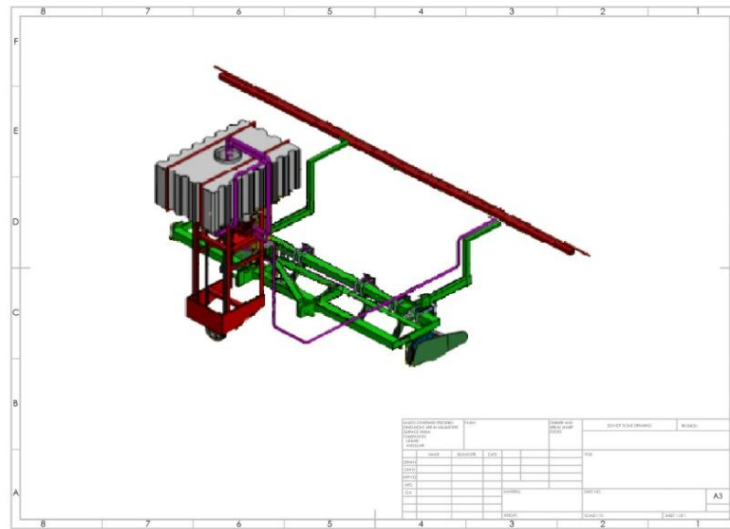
Developed tractor drawn Inter-cultivator cum sprayer with soybean hoe assembly
